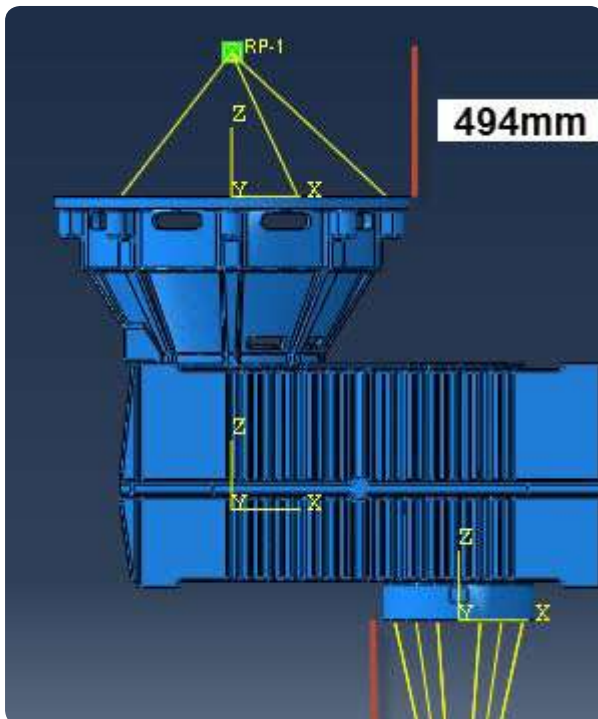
Outline of the ACC gearbox indicating location of the coupled fan and electromotor (not shown) centre of masses
